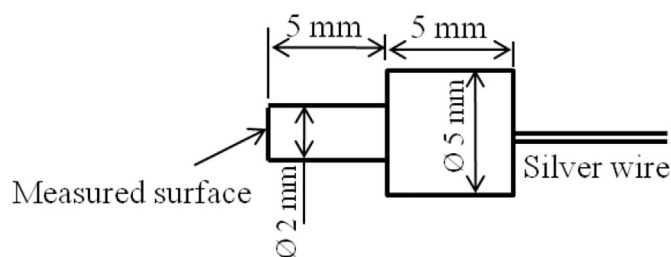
Schematic drawing showing the geometry and dimension of the specimen used for the CER measurements.
